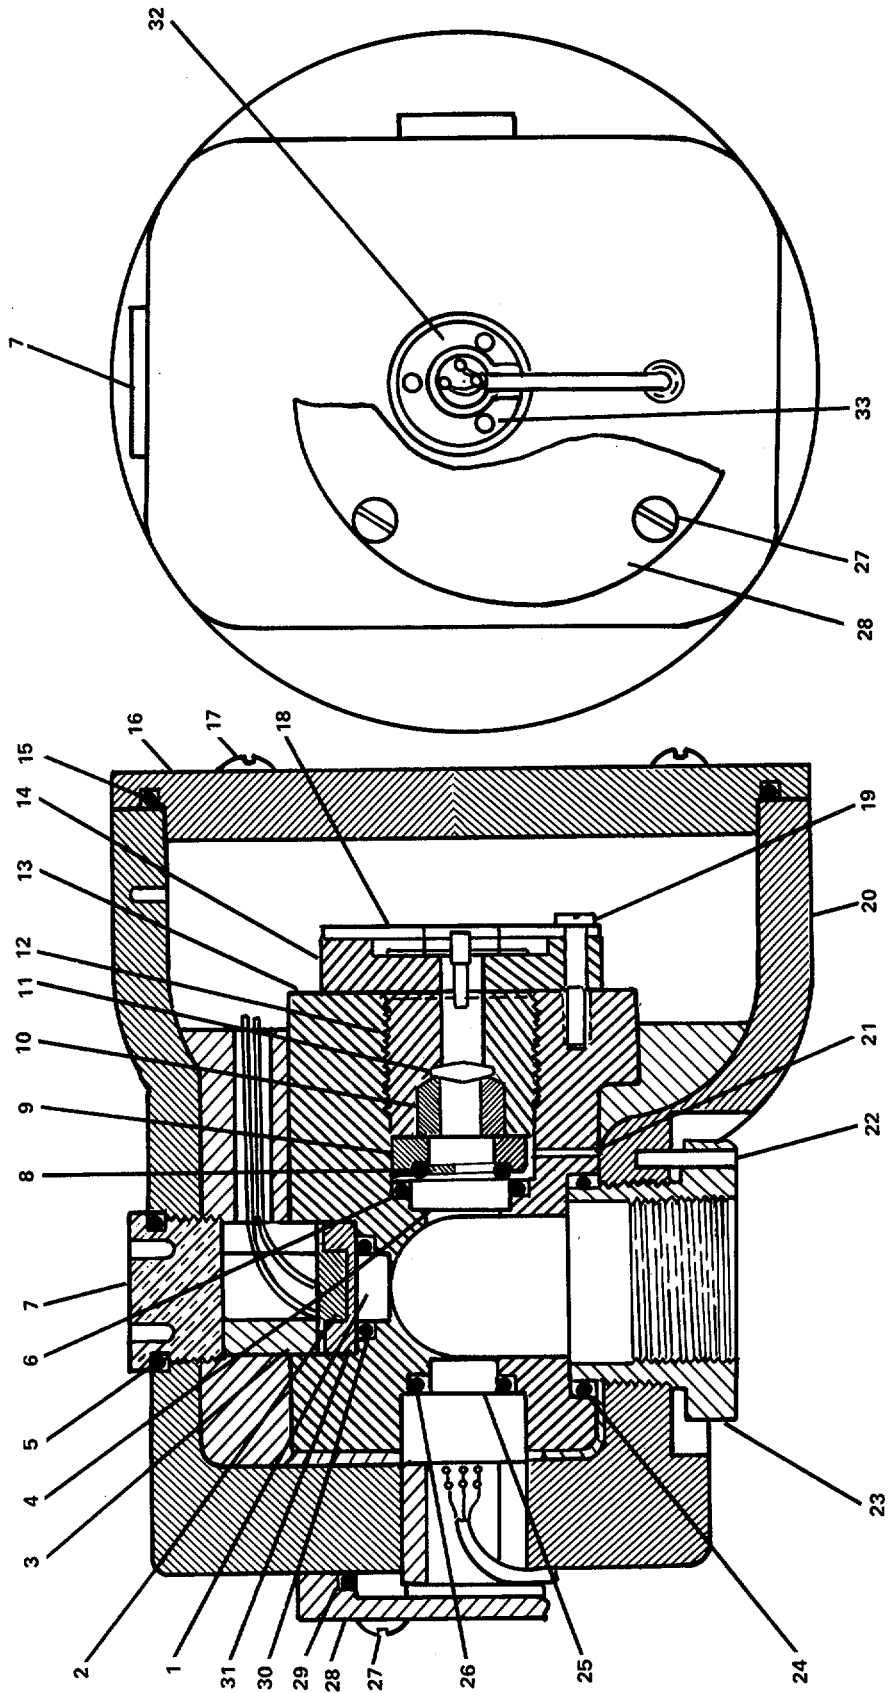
Sensing Module Assembly (Sheet 1 of 2).
